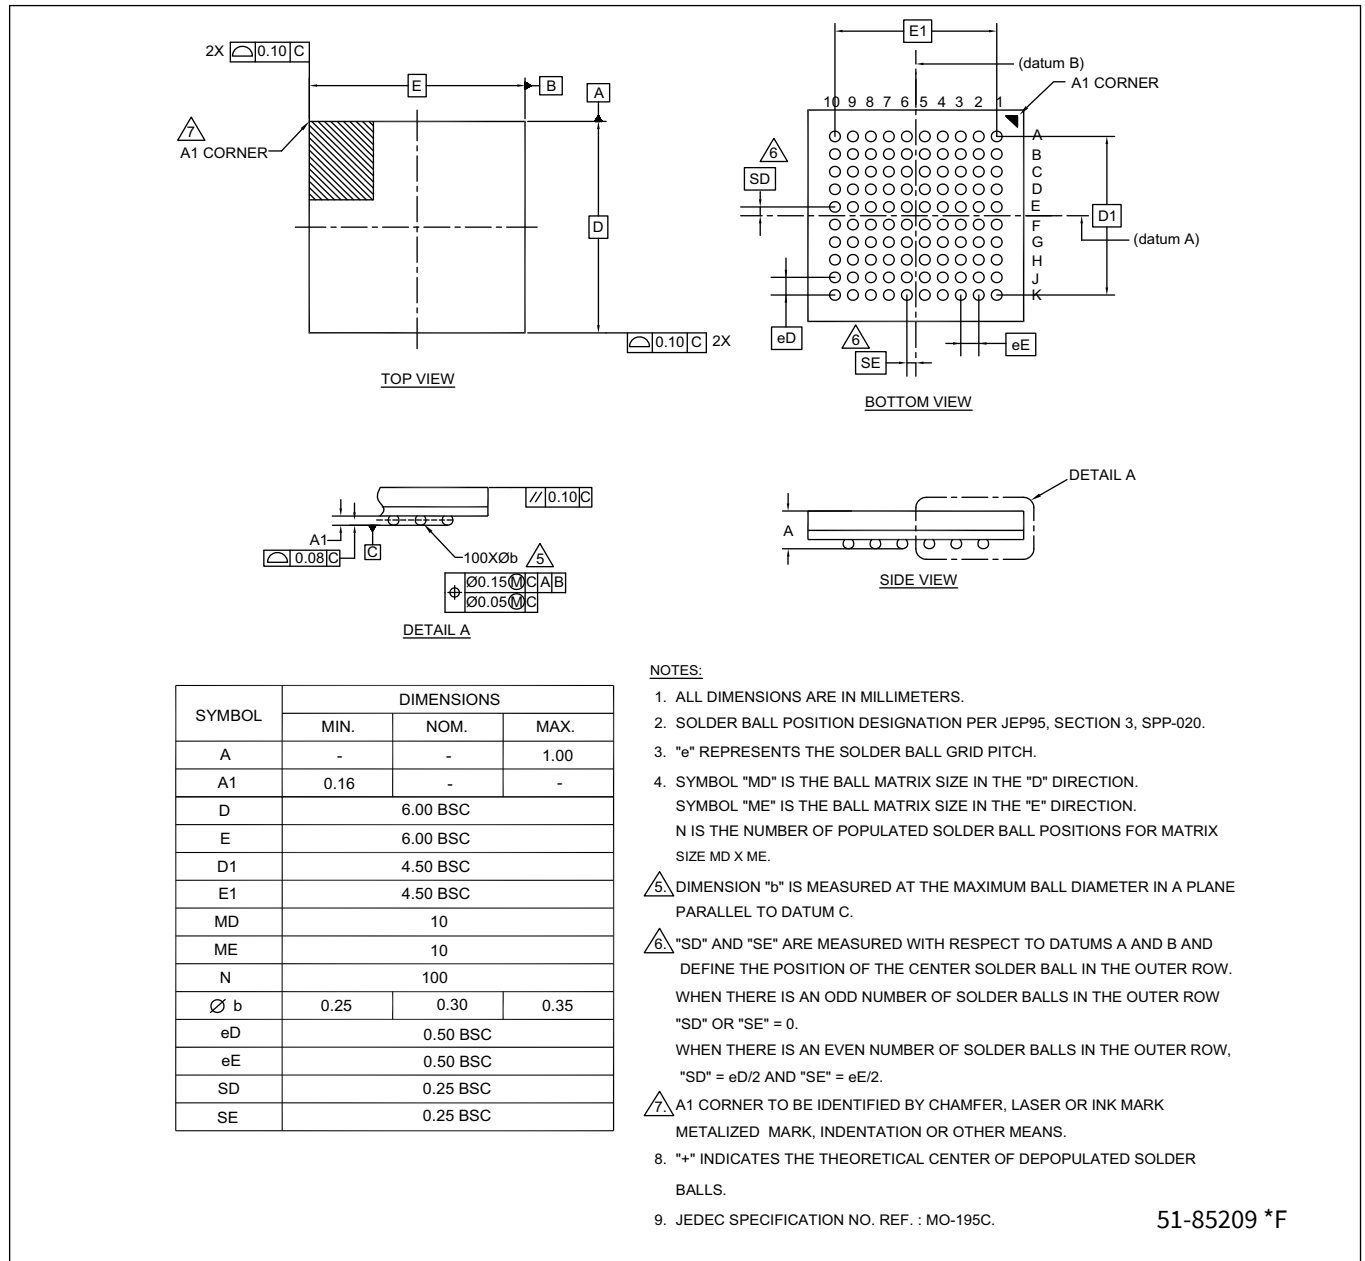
100-ball BGA (6.0 x 6.0 x 1.0 mm) BZ100 package outline (PG-VFBGA-100)
